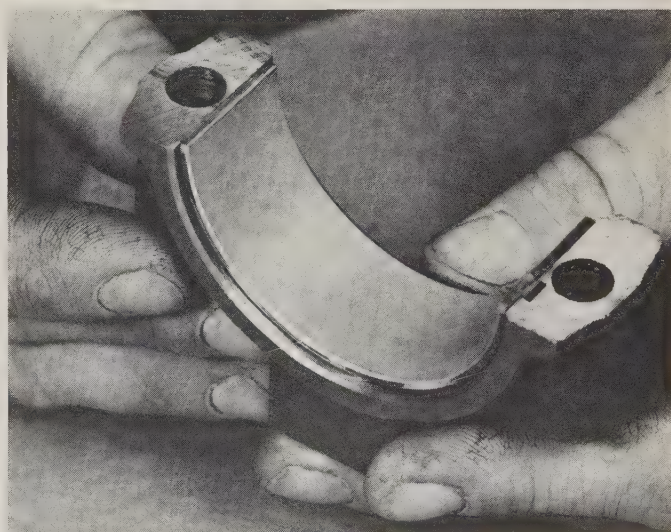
Inserting a new bearing in the connecting-rod cap. (Service Parts Division of Dana Corporation)
